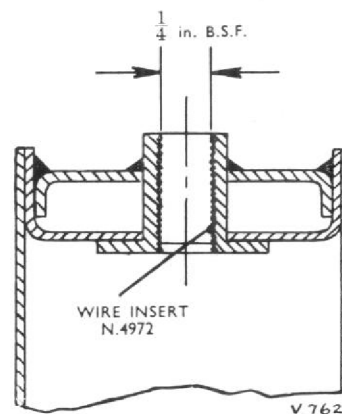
Section A-A pre-mod. 187, showing wire insert fitted to boss.
